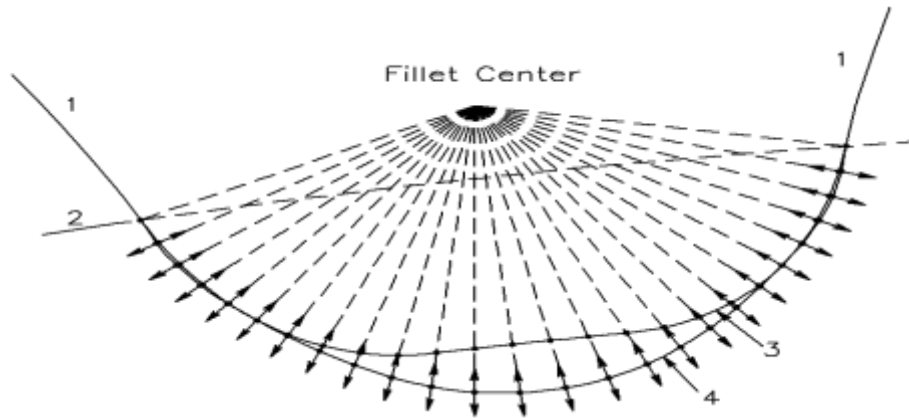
Fillet profile optimization; 1. Involute profiles; 2. Form diameter; 3. Initial fillet profile; 4. Optimized fillet profile.
